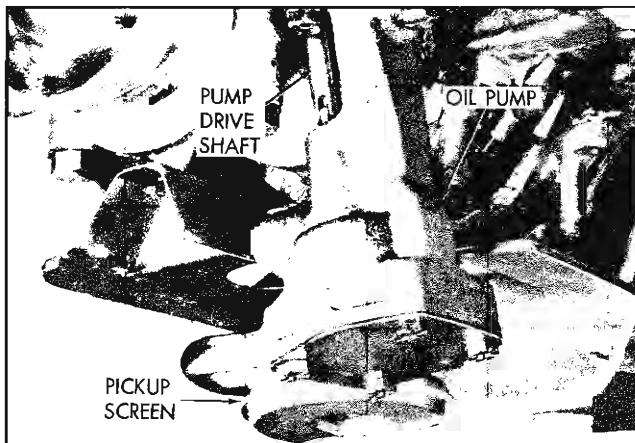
Oil Pump and Oil Pump Drive Shaft
